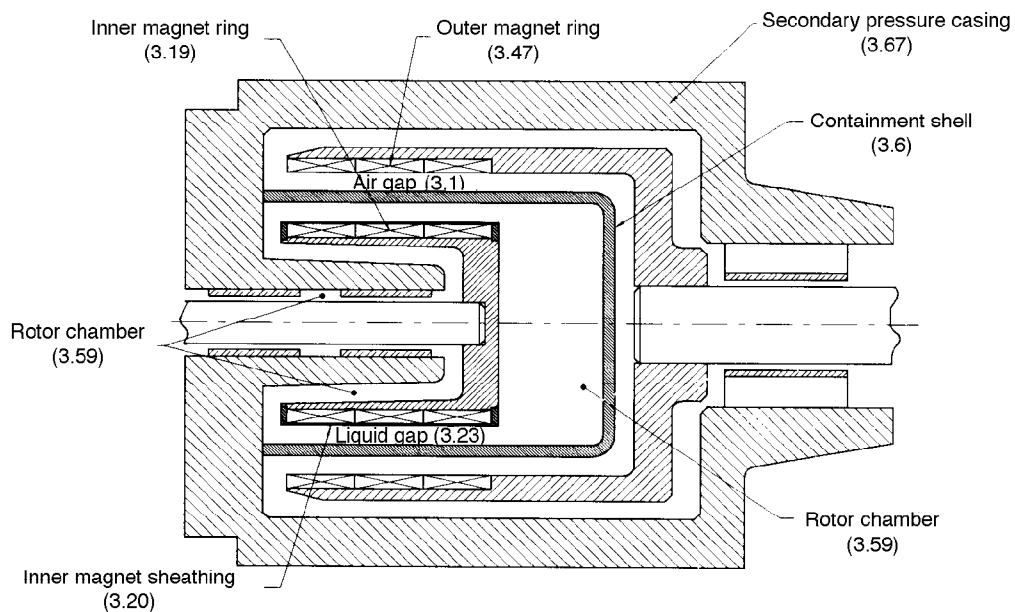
Magnetic Drive Pump Terms Defined in Section 3
